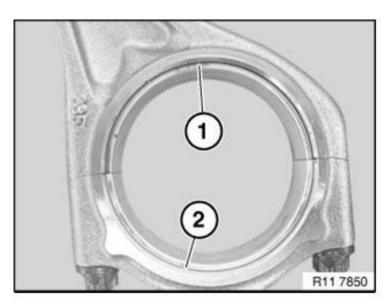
Identifying Blue And Red Bearing Shell Courtesy of BMW OF NORTH AMERICA, INC.
